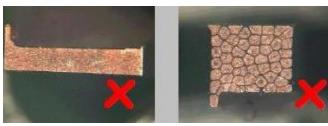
Microsection representation of welds with and without cutting edge.
